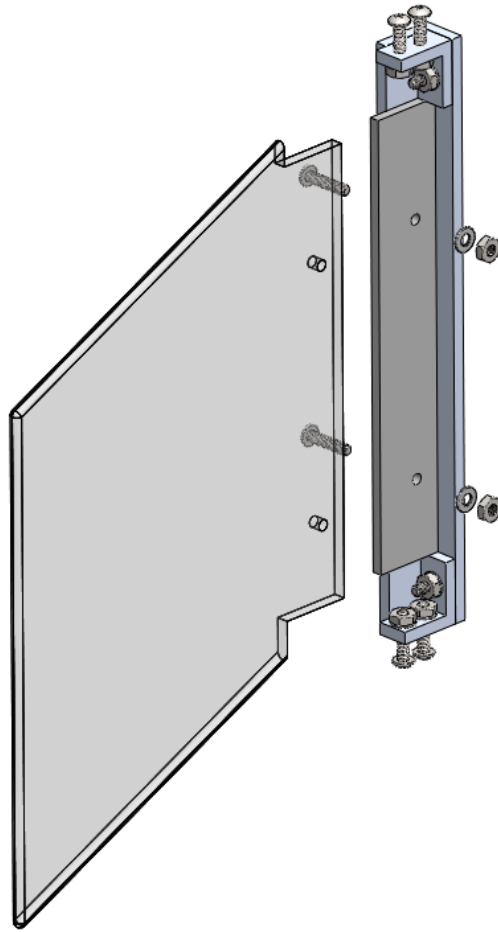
Exploded view of a fin runner with spacer and fin.
